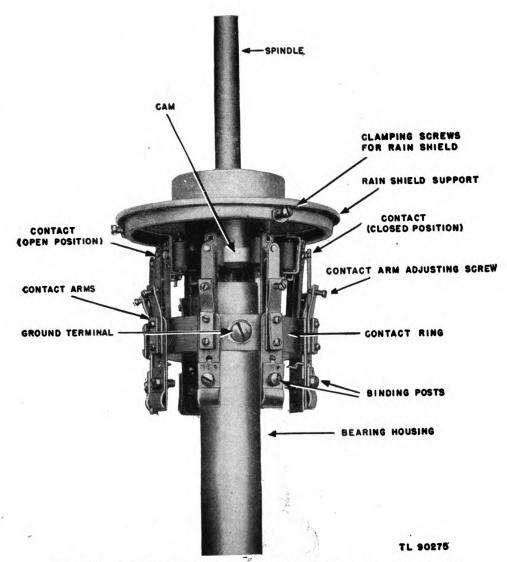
Bearing ML-129-B or ML-129-E, showing contact assembly, rainshield removed.
